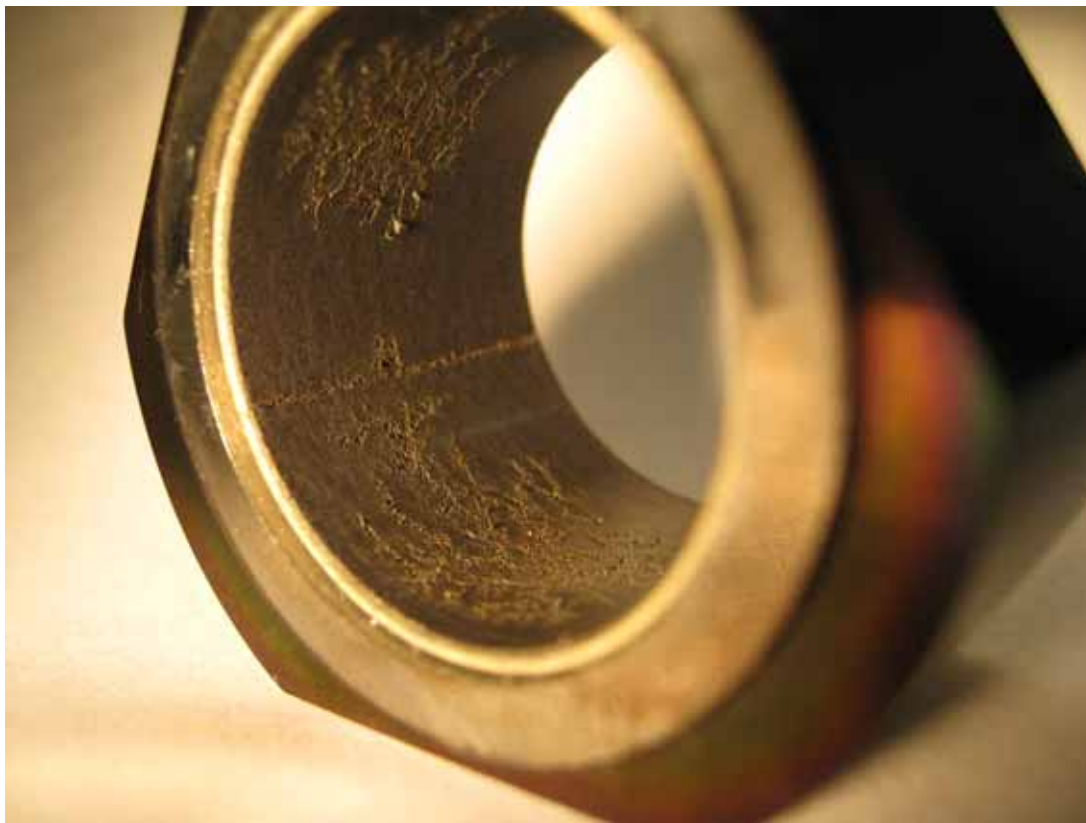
Wear marks on the OH-CAZ's HP pump eccentric cam bearing Teflon coating.
